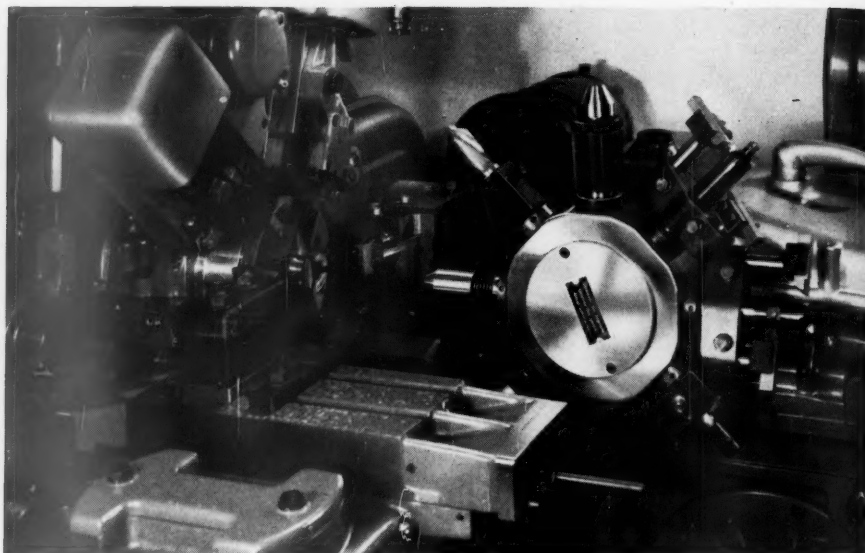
In this set-up a water pump body is multi-drilled, 3 holes, from the turret and side-drilled, 2 holes, from the back slide
